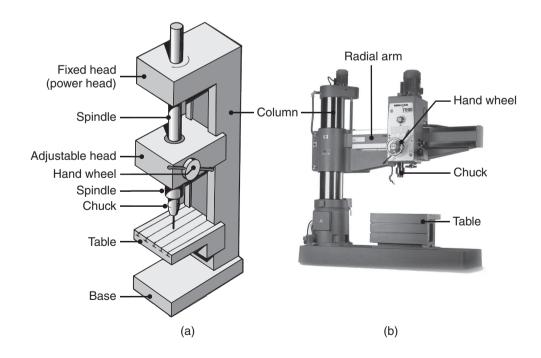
(a) Schematic illustration of the components of a vertical drill press. (b) A radial drilling machine. *Source:* (b) Courtesy of Willis Machinery and Tools.
